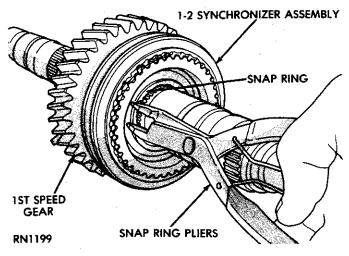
Removing/Installing 1-2 Synchronizer Snap
